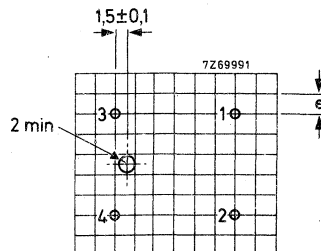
Hole pattern for mounting on a printed-wiring board (component side). Hole diameter $1,3 \pm 0,1$ mm. $e = 2,54$ mm (0,1 in).
